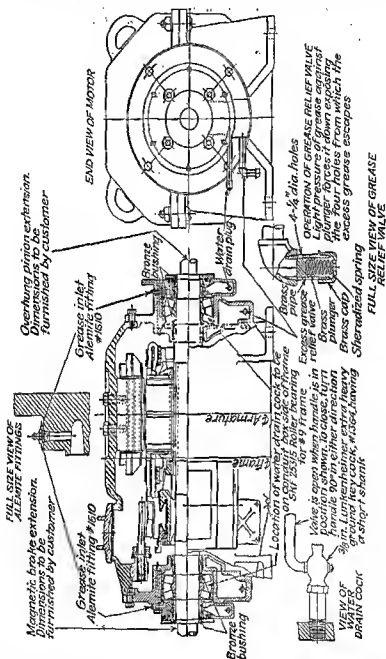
Typical winch motor. (Courtesy of General Electric Company.)
